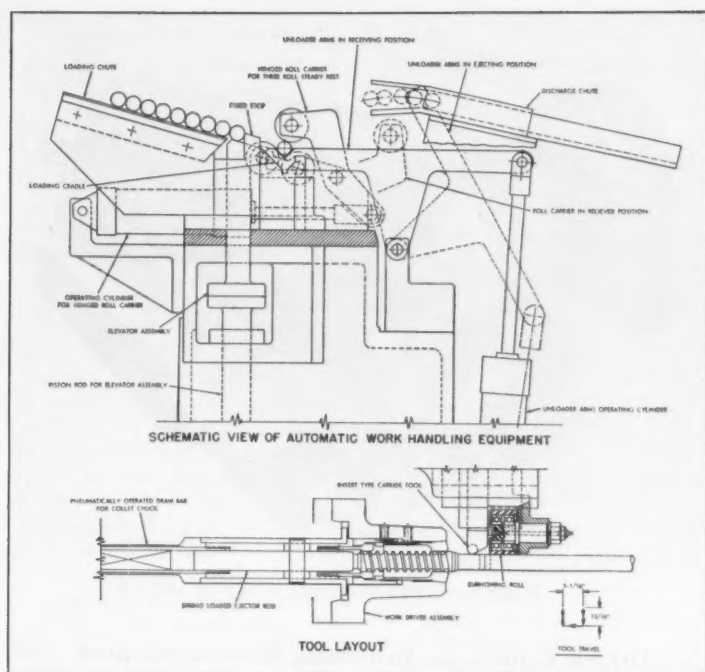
(Upper view) Diagram showing work-handling equipment of lathe illustrated in Fig. 1. (Lower view) Diagram illustrating method of holding and driving work and arrangement of carbide tools employed on Seneca Falls automatic lathe
